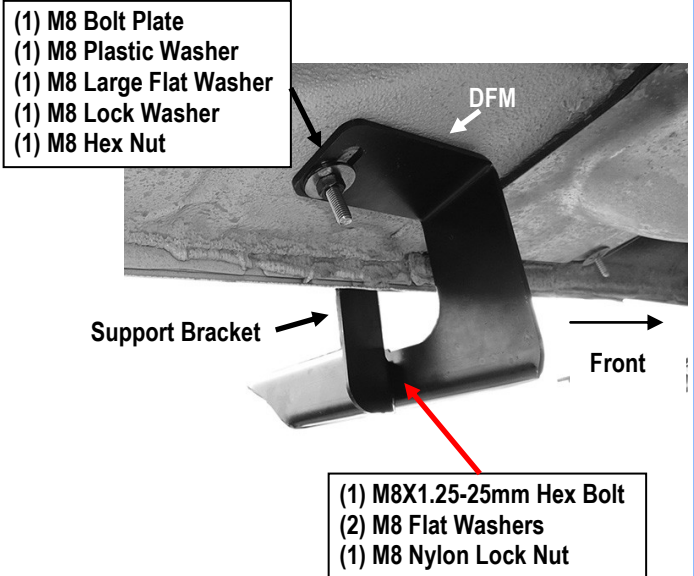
Driver Front Mounting Bracket (DFM) Installation
